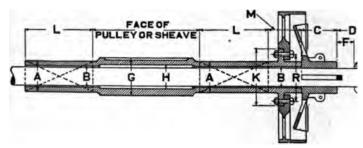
,858.—Quill drive. This is the proper transmission arrangement substitute is service, requiring large pulleys, sheaves, gears, rotors, etc. It is a hollow shaft is by independent bearings. The main driving shaft running through the quill lieved of all transverse stresses. The power is transmitted to the quill by m friction or jaw clutch. When the clutch is thrown out the pulley or sheave stand the driving shaft revolves freely within the quill. As there is no contact betwee parts there is no wear. Jaw clutches should be used for drives demanding positiv displacement. They can only be thrown in and out of engagement when at rest, large clutch pulleys, sheaves, or gears designed to run loose on the line shaft are 1 mounted on quills. The letters A, B, C, etc., indicate the dimensions to be si ordering a quill.
